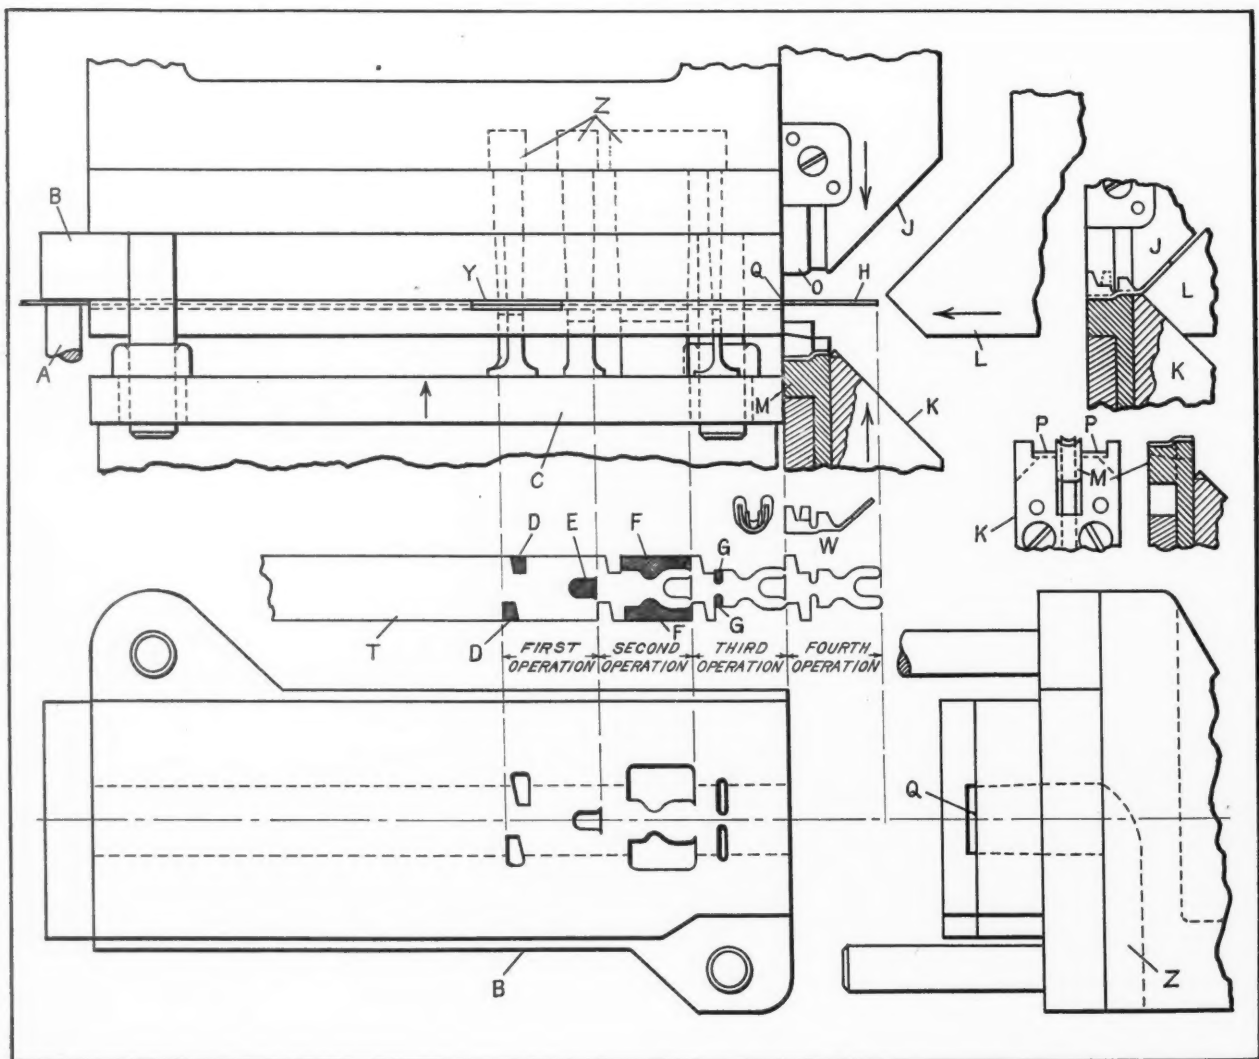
View Showing How Tools Illustrated in Fig. 3 are Assembled, and How they Operate in Producing Part W
